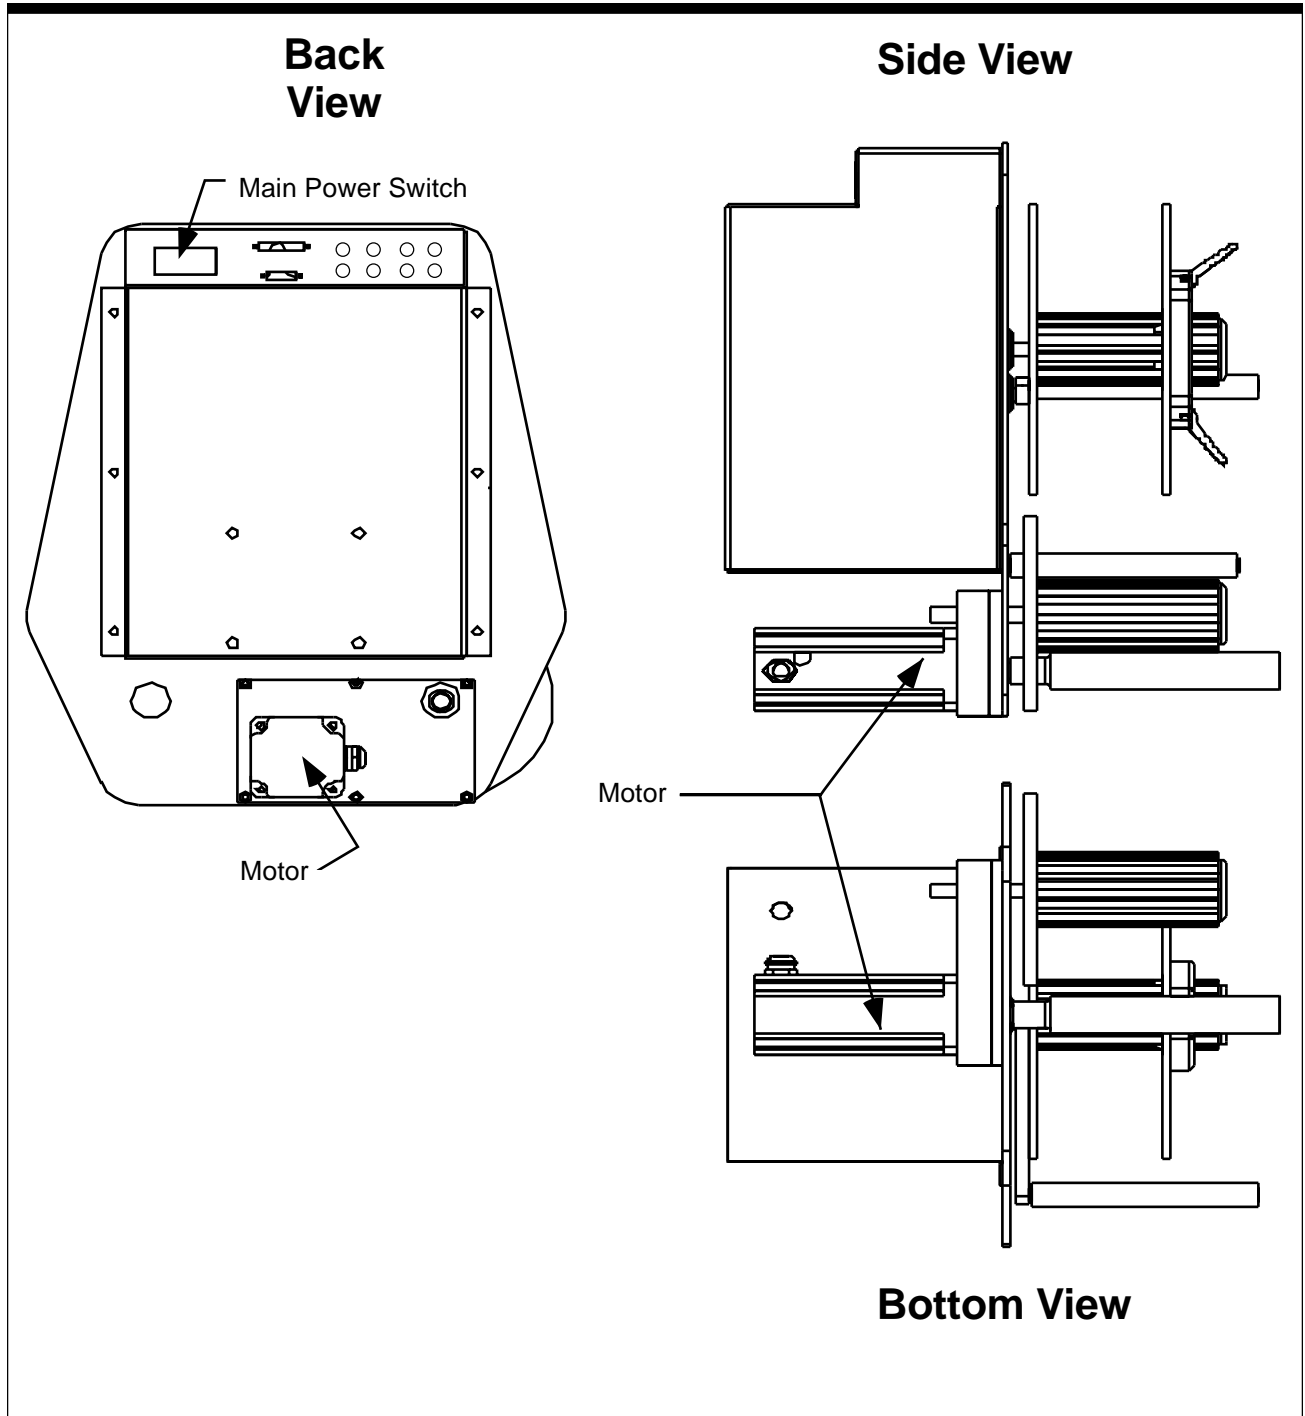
Back View, Side View and Bottom View Of Label Applicator
